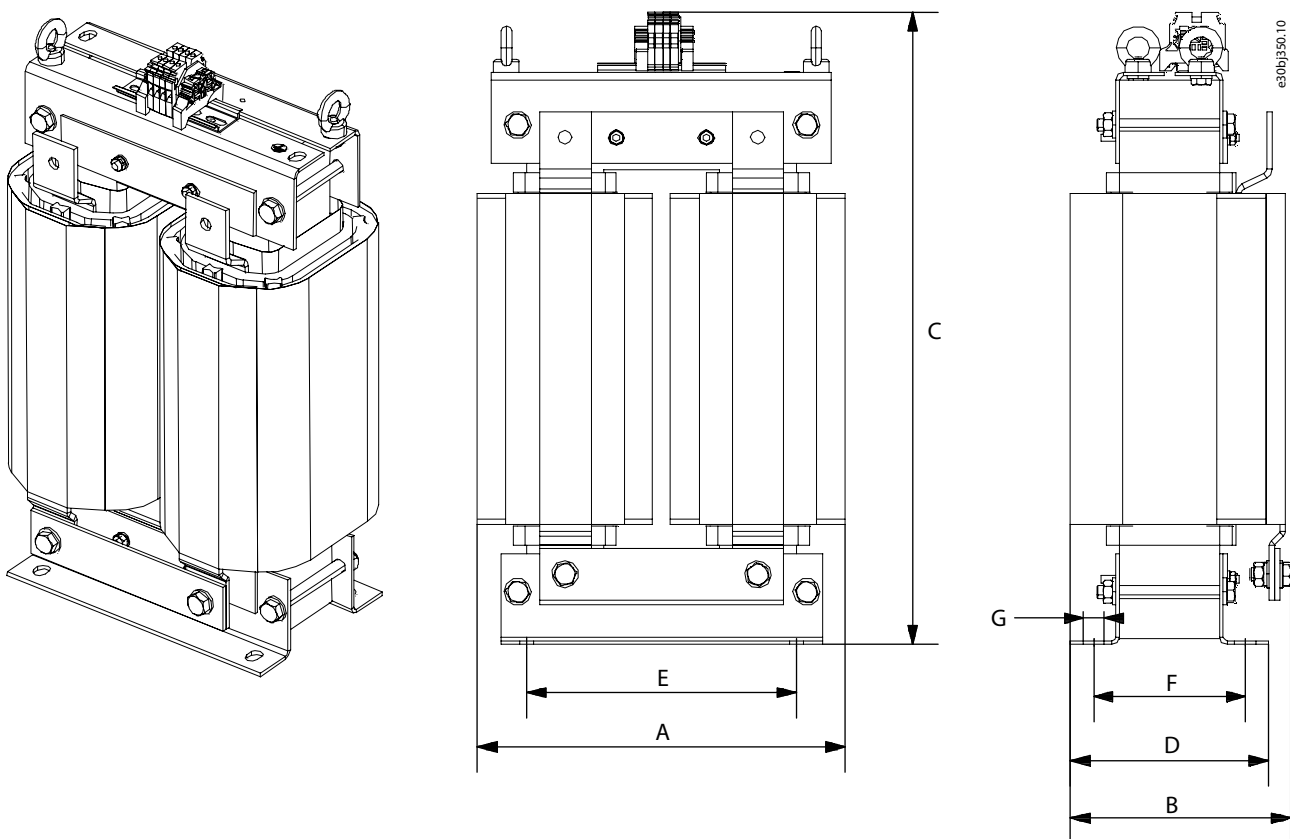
Dimensions of the Air-cooled Inductors, >30 A
